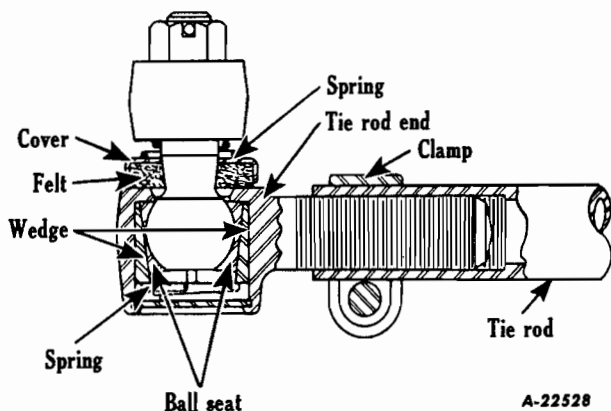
Tie rod assembly - Models F-270, F-280, F-360.
